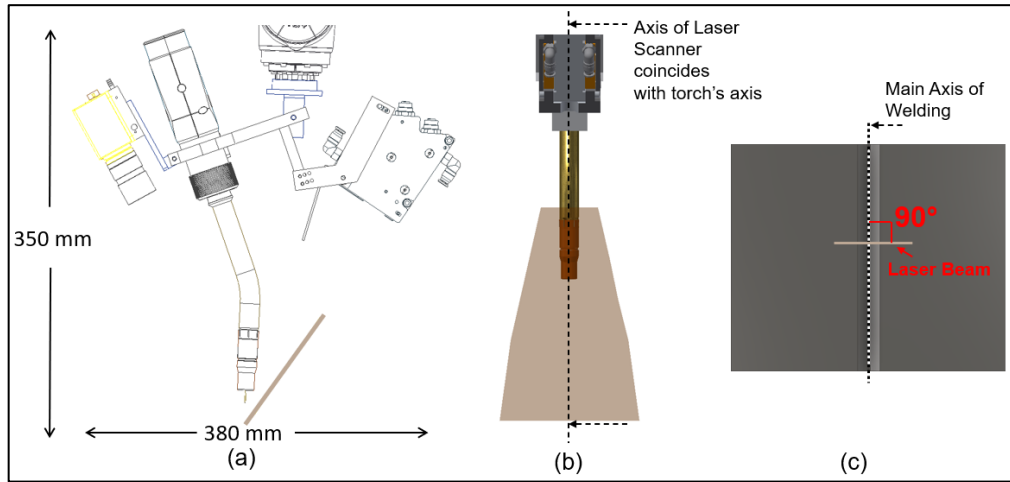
Laser stripe forms  $90^\circ$  relative to main axis of welding for angle  $C=0^\circ$ : (a) Side View, (b) Front view, (c) Top View with projected laser stripe in a single-sided V-groove.
